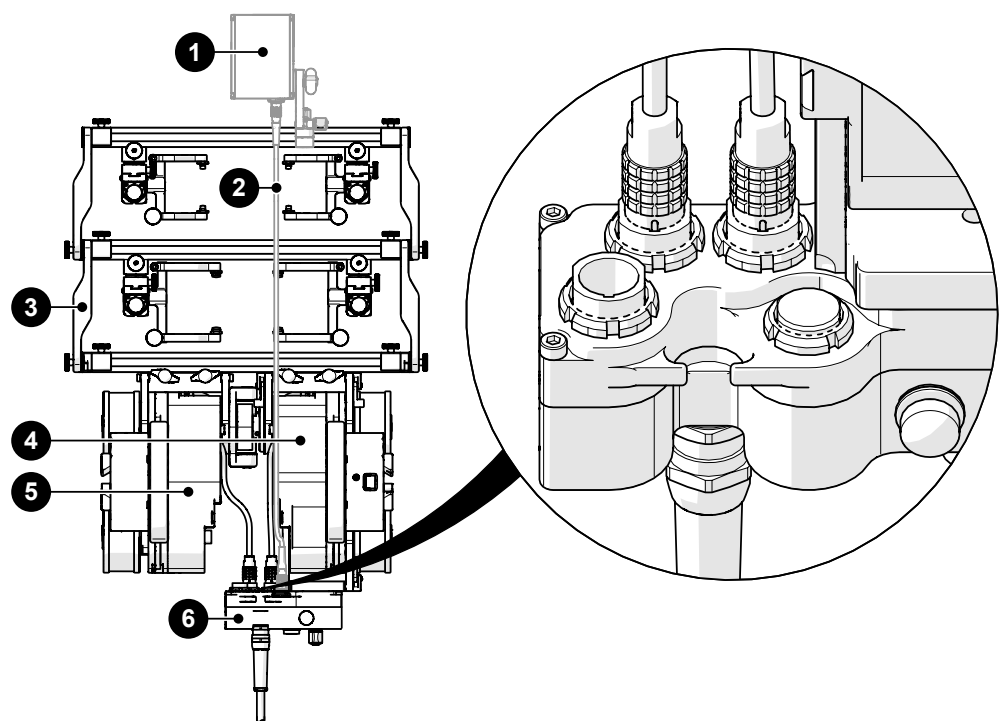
Standard crawler configuration with vertical probe holder frame
